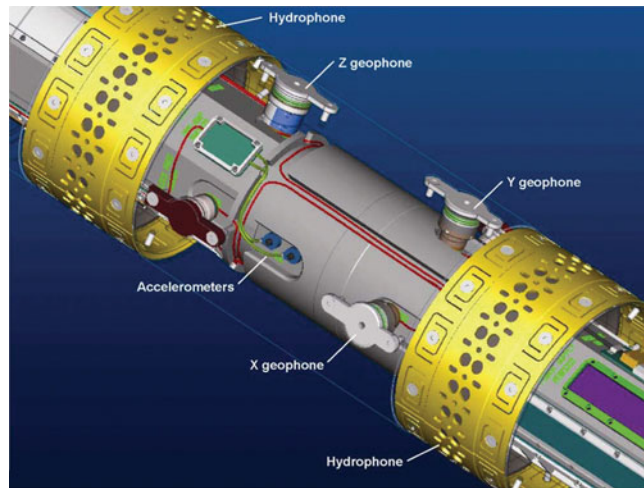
One drill-string seismic sensor package used to acquire seismic data while drilling. This module is positioned in the bottom-hole assembly near the drill bit.
